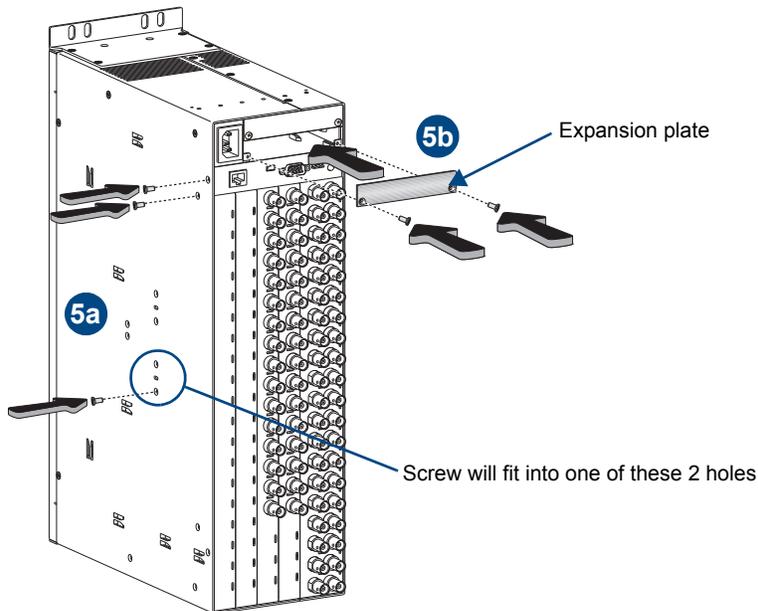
Replace 3 screws and expansion plate (2 screws)
